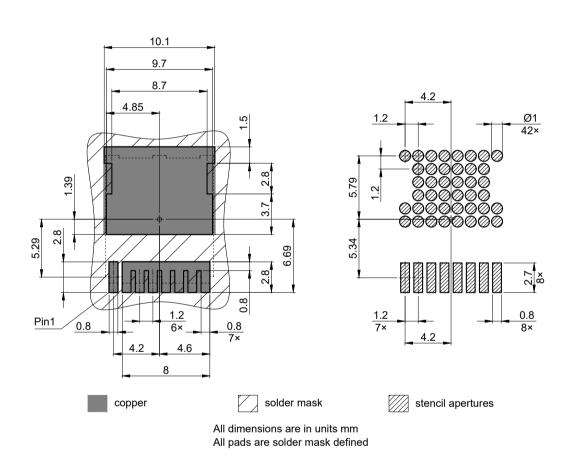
Footprint Drawing PG-HSOF-8, dimensions in mm
